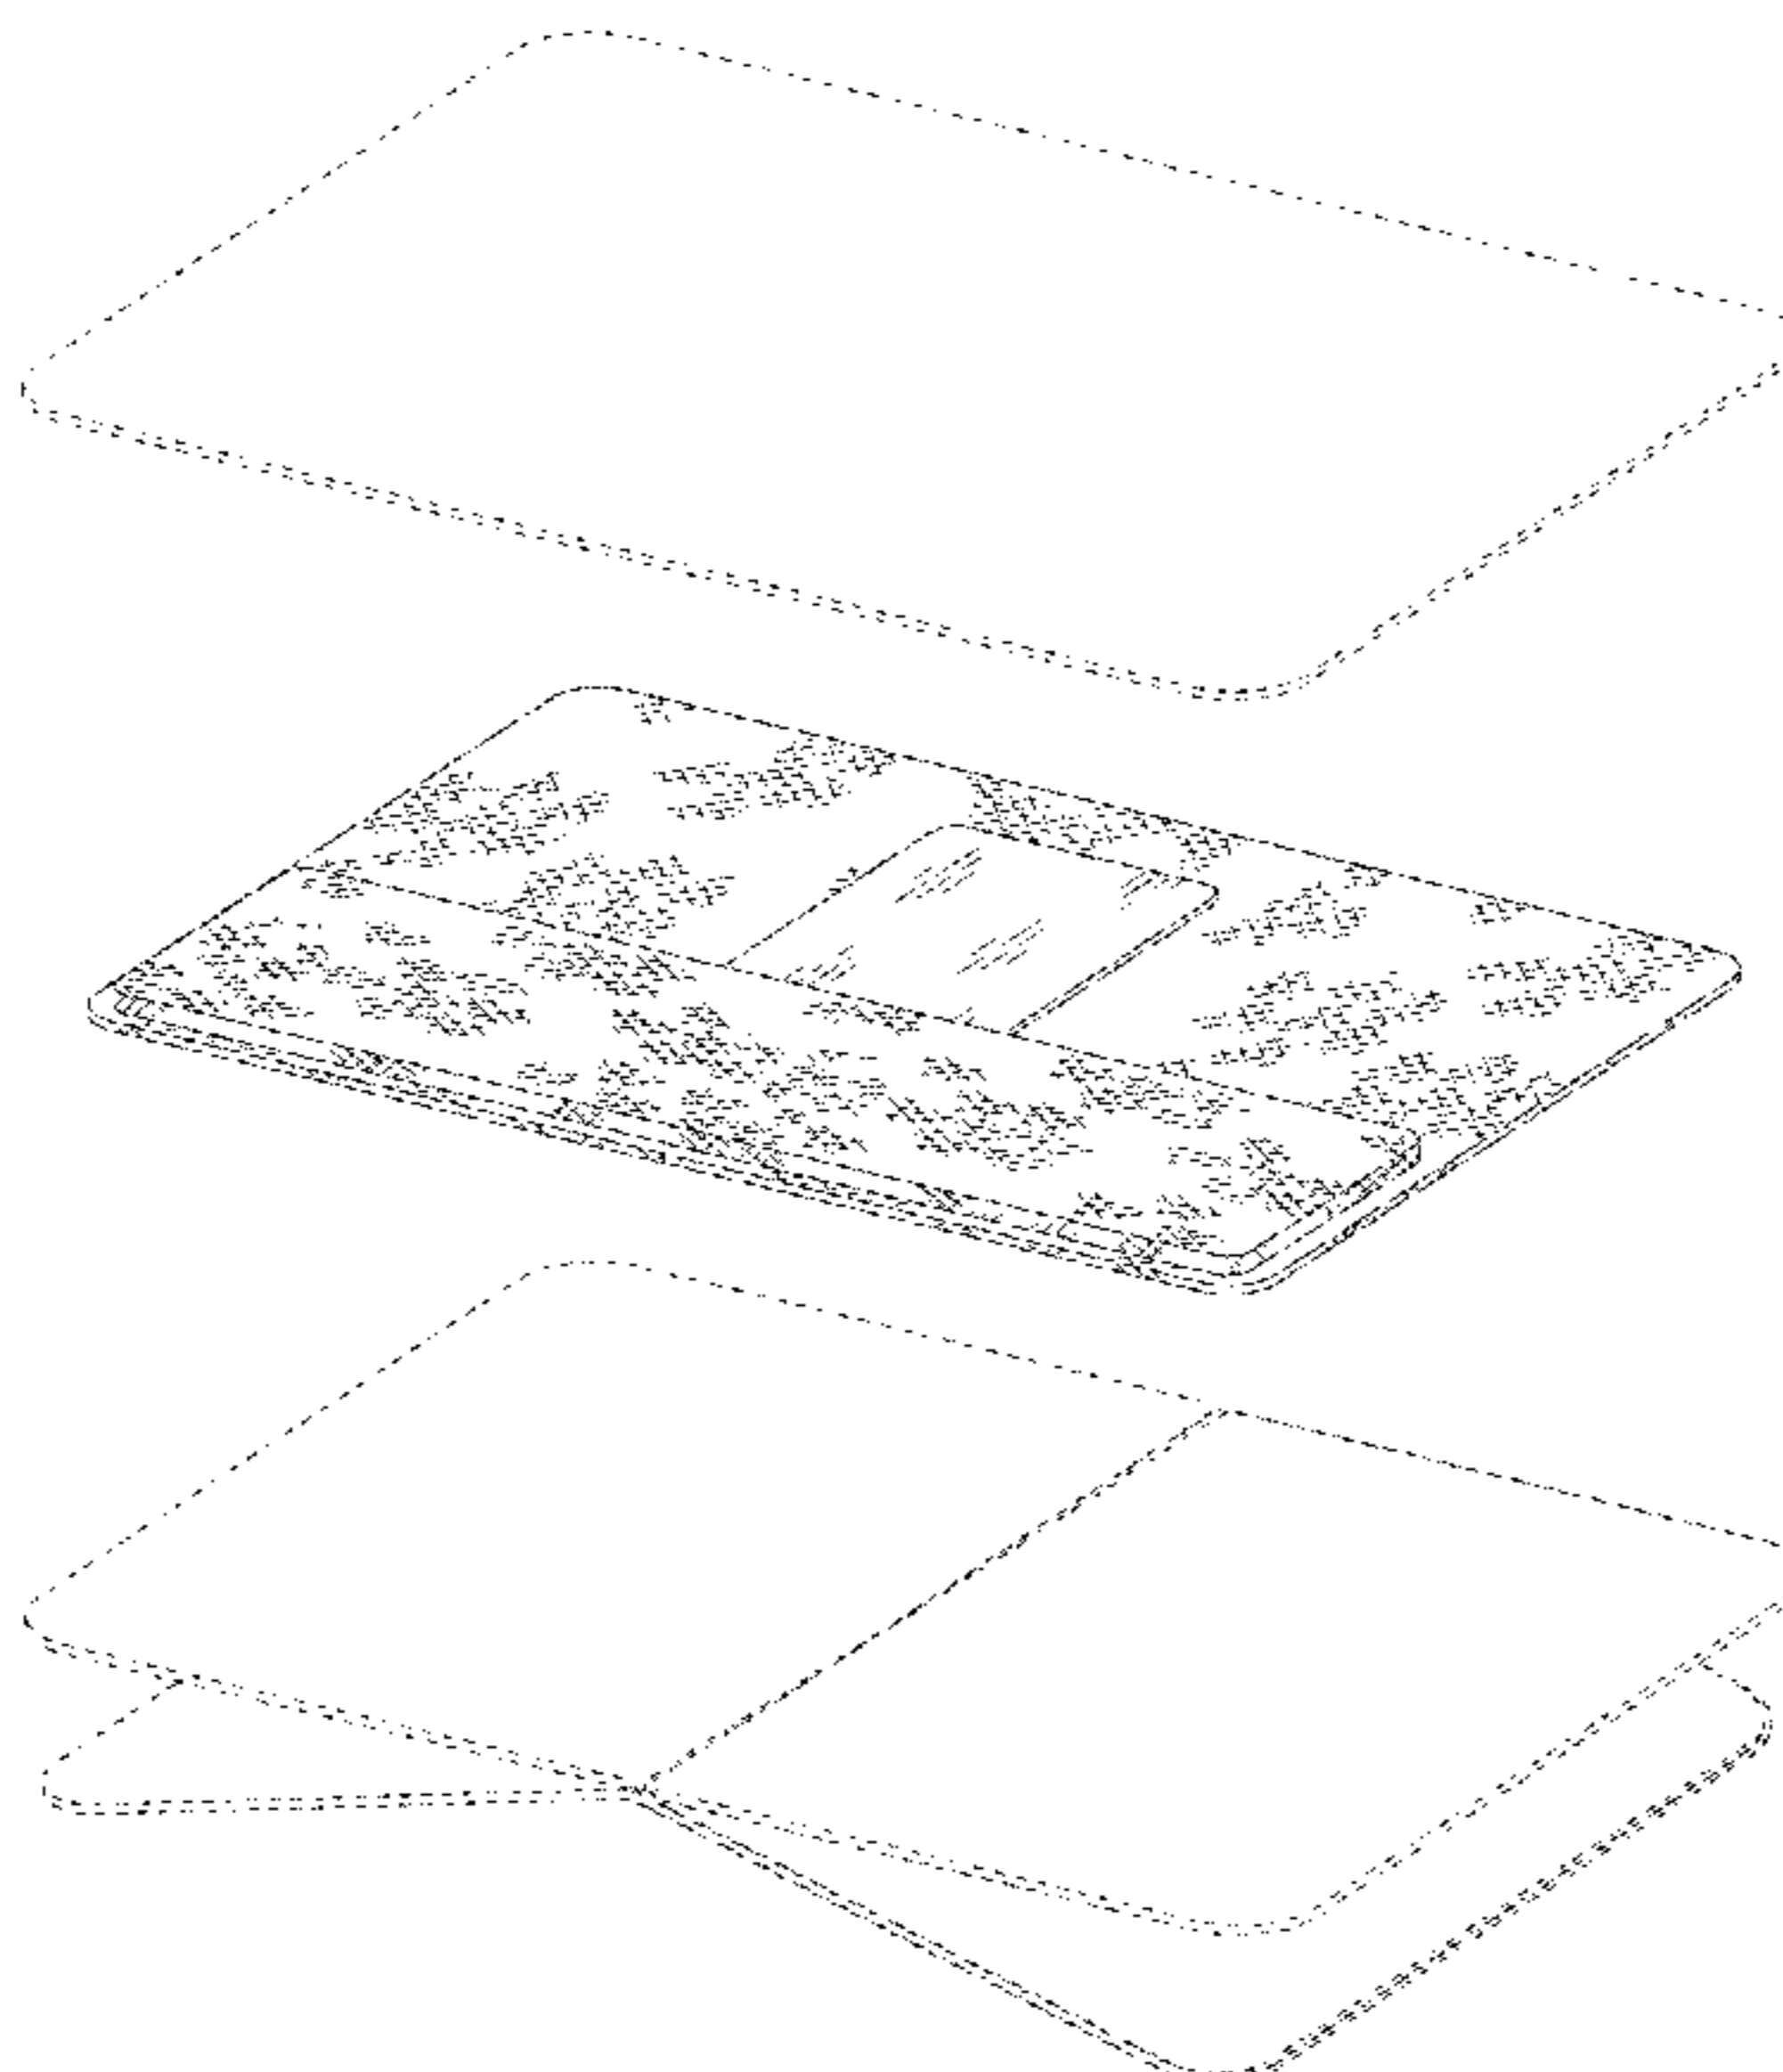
is an exploded perspective view showing a catheter securement pad;
